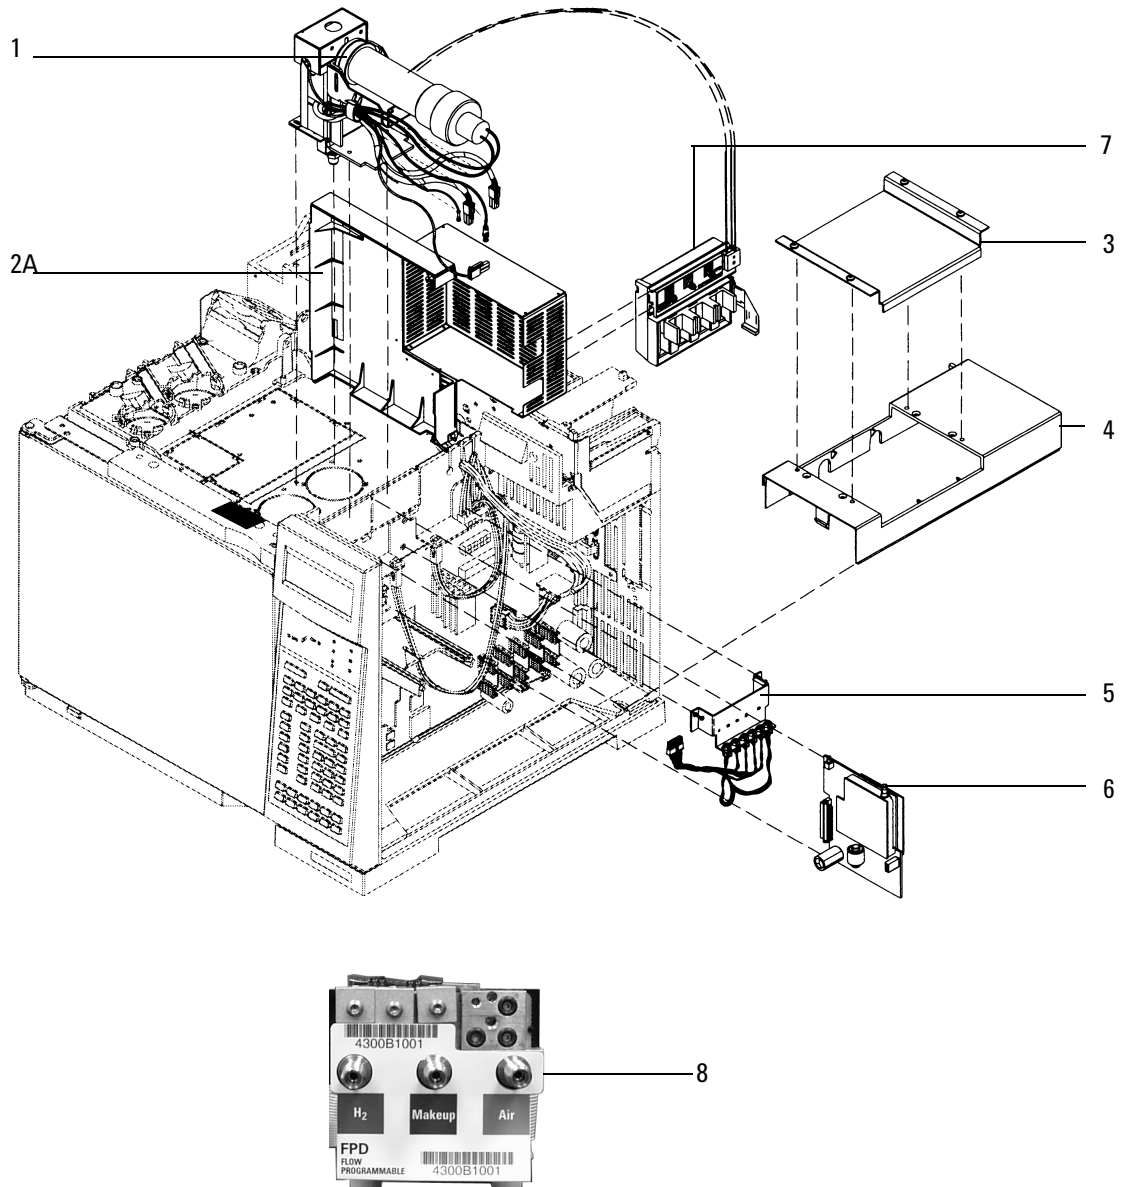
Exploded diagram of the FPD covers, manifolds, and electronics
